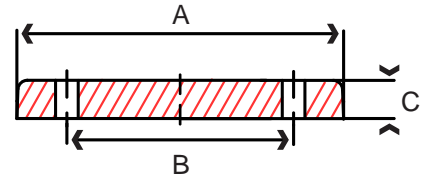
HB1 – 125 lb. Blind Hydrant Flange
